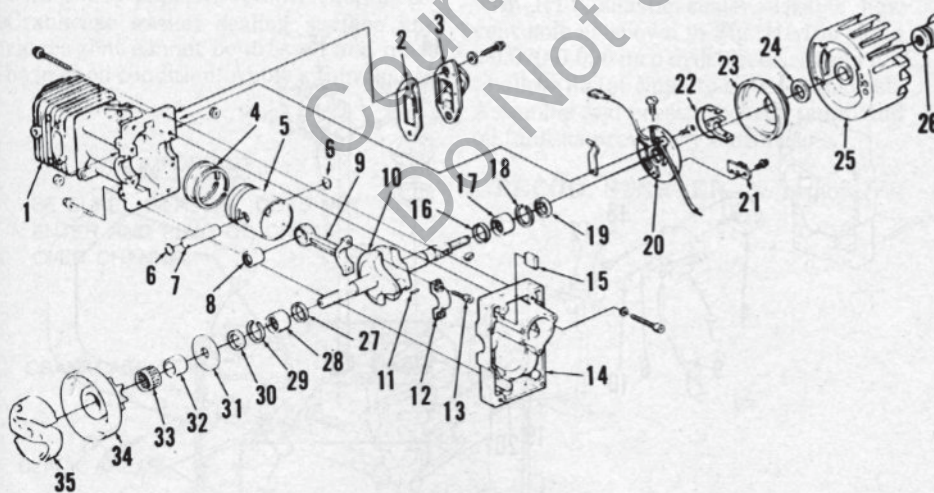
Exploded view of 150 Automatic engine, clutch and flywheel assemblies.
